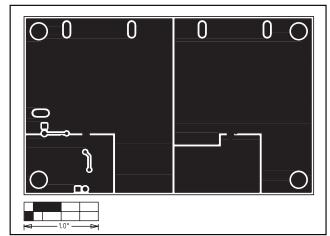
MAX1846 EV Kit PC Board Layout—Solder Side
